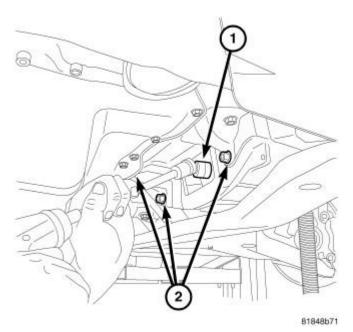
Removing/Installing Torque Converter Bolts & Lower Bellhousing Bolts Courtesy of CHRYSLER GROUP, LLC
